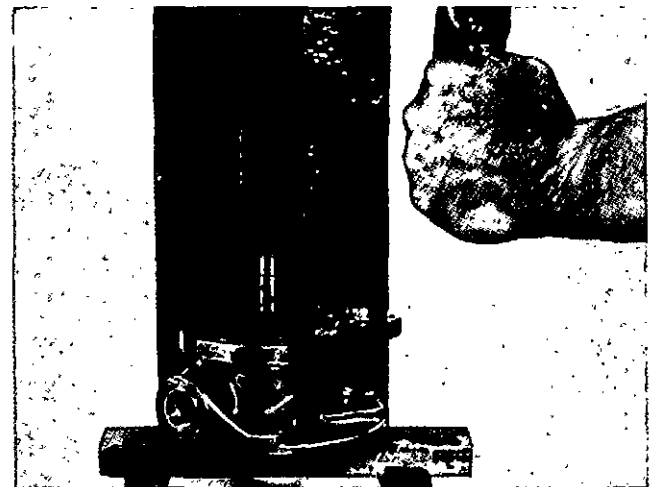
, (F5277). Press the drive shaft assembly into the cover.
